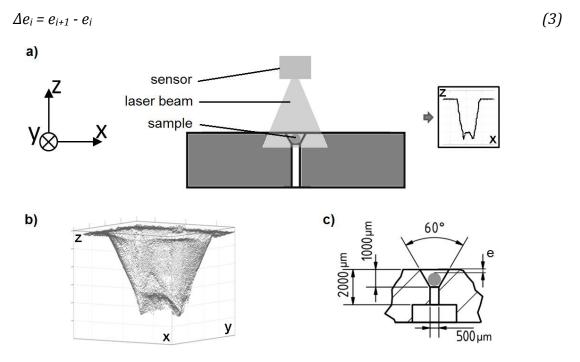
3D-measurement: a) set-up, b) typical measurement, c) tool geometry
